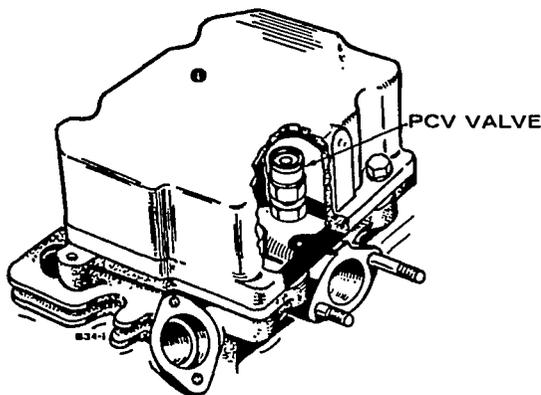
CRANKCASE BREATHER WITH PCV VALVE
